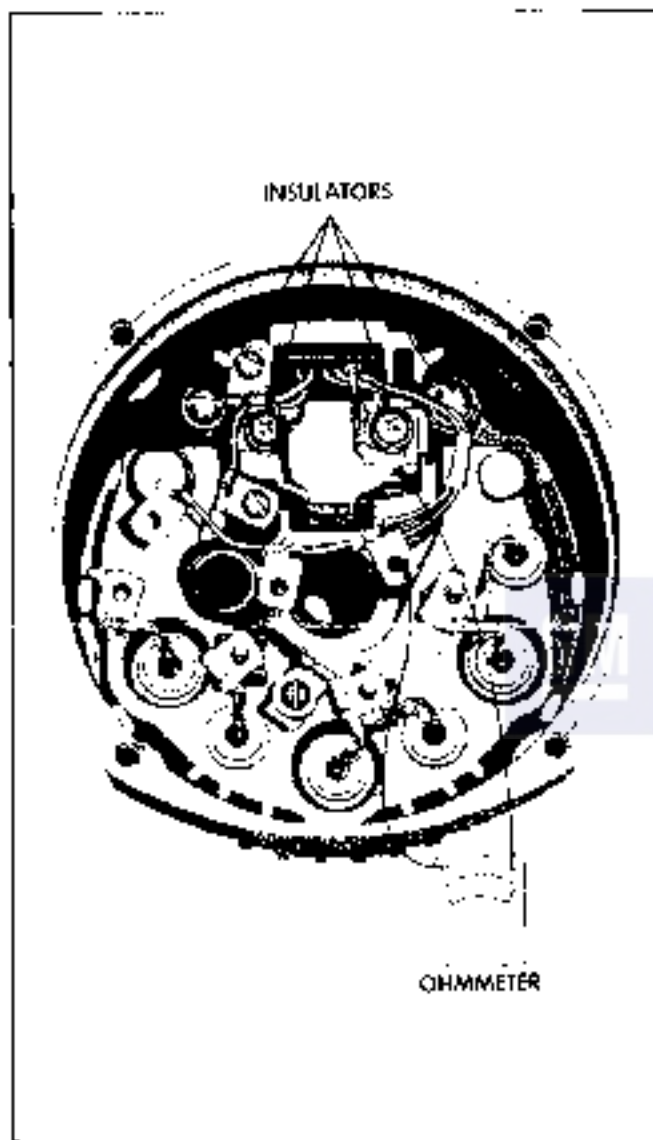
E-19 Regulator Checks - C.S.I. Generator
